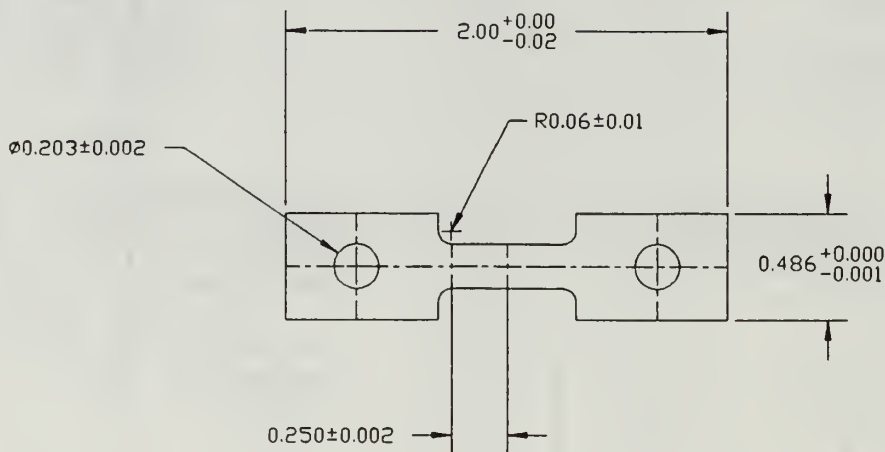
Dimensions and tolerances for tensile test specimens.
